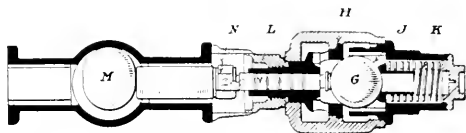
VALVE MECHANISM OF ATKINSON STEAM TRUCK ENGINE
